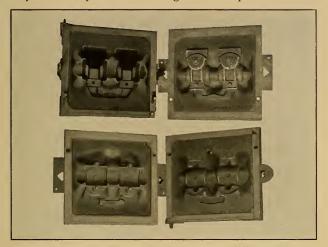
Upper left—Cope-Mould; right—Cope side of plate. Lower left—Drag side of plate; right—drag mould.
